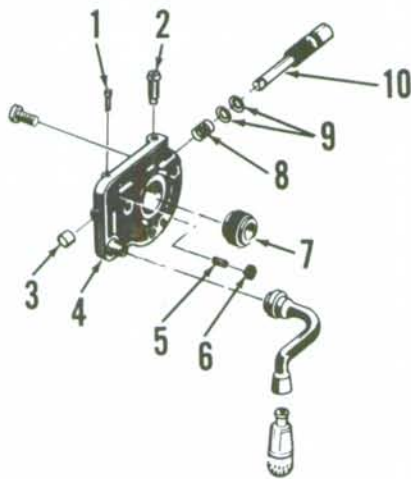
Exploded view of oil pump used on Models 40 Rancher, 44, 340SE, 340SG, 444SE and 444SG.
